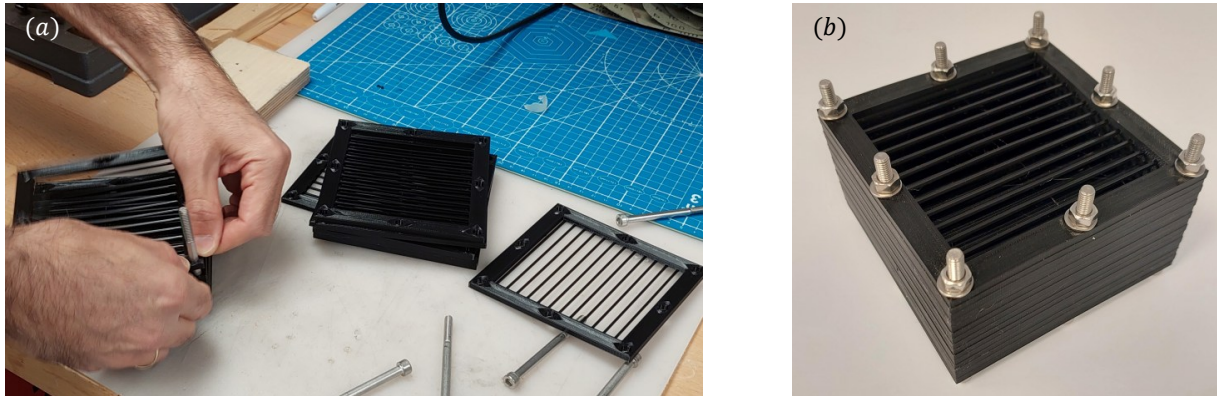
Mold preparation with 3D-printed TPU sheets and uniformly spaced fibers. (a) Assembling the mold, and (b) the prepared mold.
